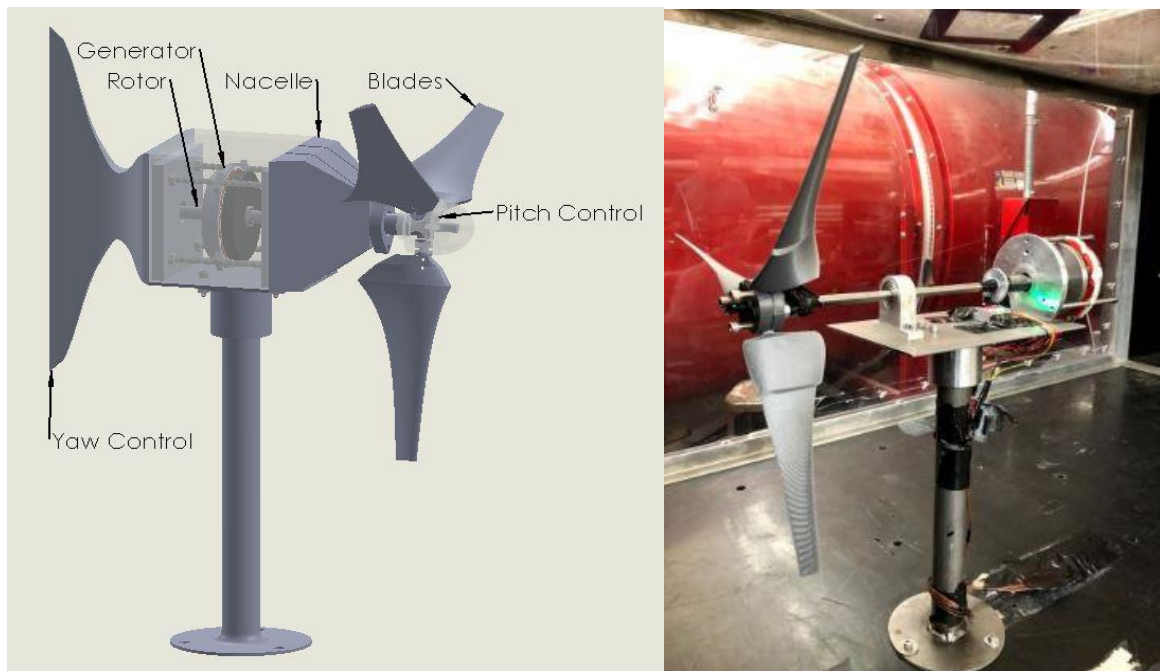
(L) Turbine prototype CAD model; (R) Prototype turbine assembly in wind tunnel test
